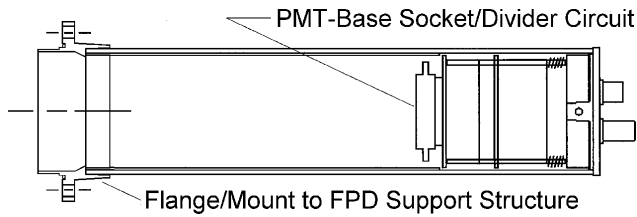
Schematic layout of the TRIUMF/G0 PMT-base assembly.
